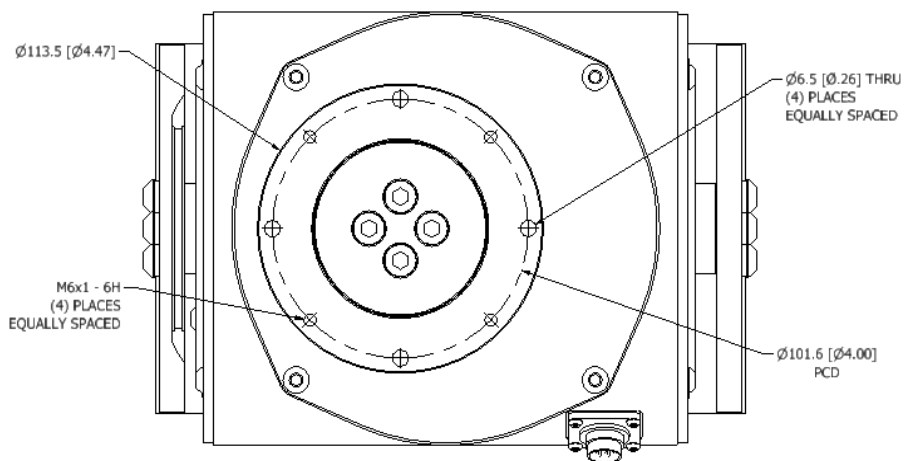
AP-50 OTT & AP-50 Side Mount Mounting Pattern (Bottom of Positioner)
